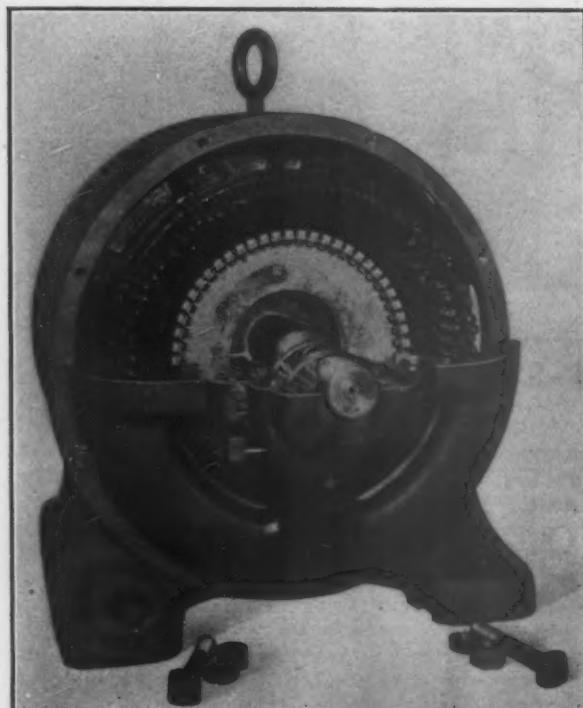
Motor with Upper Half of Bearing Bracket Removed, Showing Accessibility of Interior.
